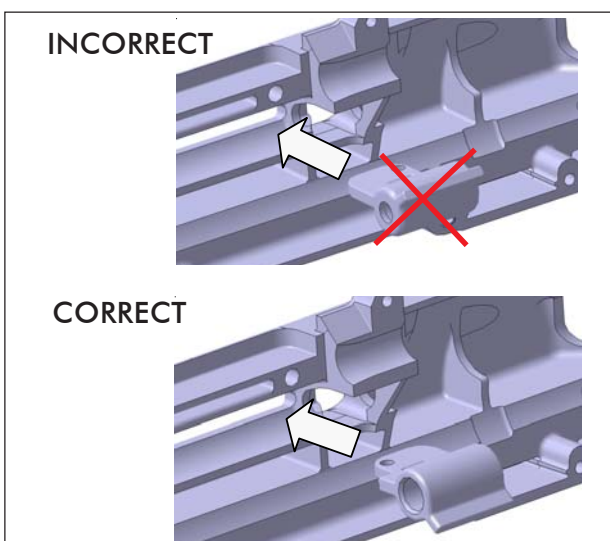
u - Reassembly of the guide, cocking handle (136)
